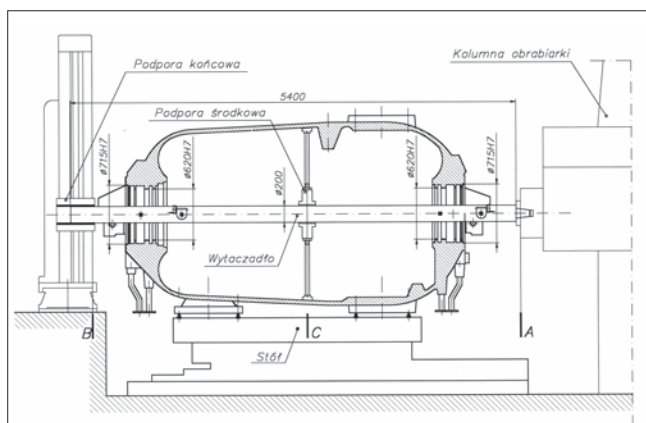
Setting a boring bar for machining holes for stuffing boxes [6]
